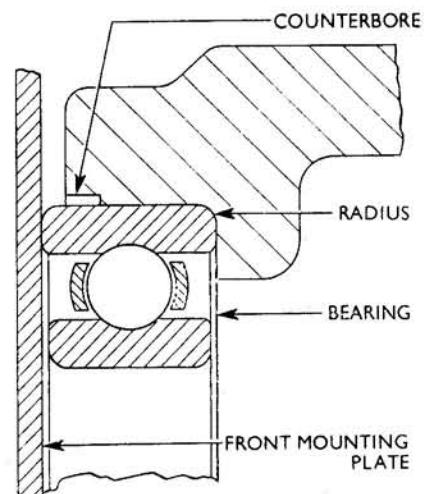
Latest auxiliary driveshaft front bearing (6—Fig. 38) can be used only with cylinder block incorporating counterbore. Early bearing (part No. DKN-66618-A) can be used with all cylinder blocks.
